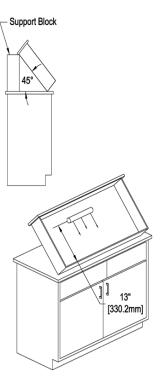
Base Cabinet Drawer Internal Rolling Impact Test Configuration
